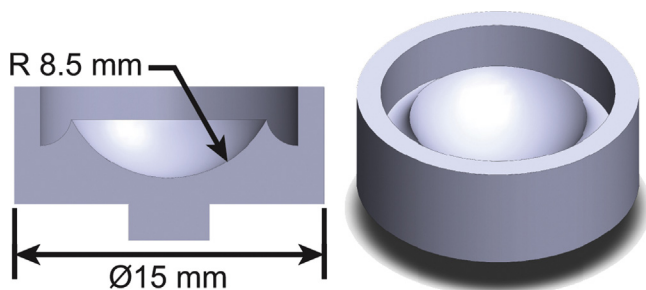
CAD model of the contact lens mold showing dimensions that defined the contact lens; on the left is a cross-sectional view and on the right is a 3D isometric view.
